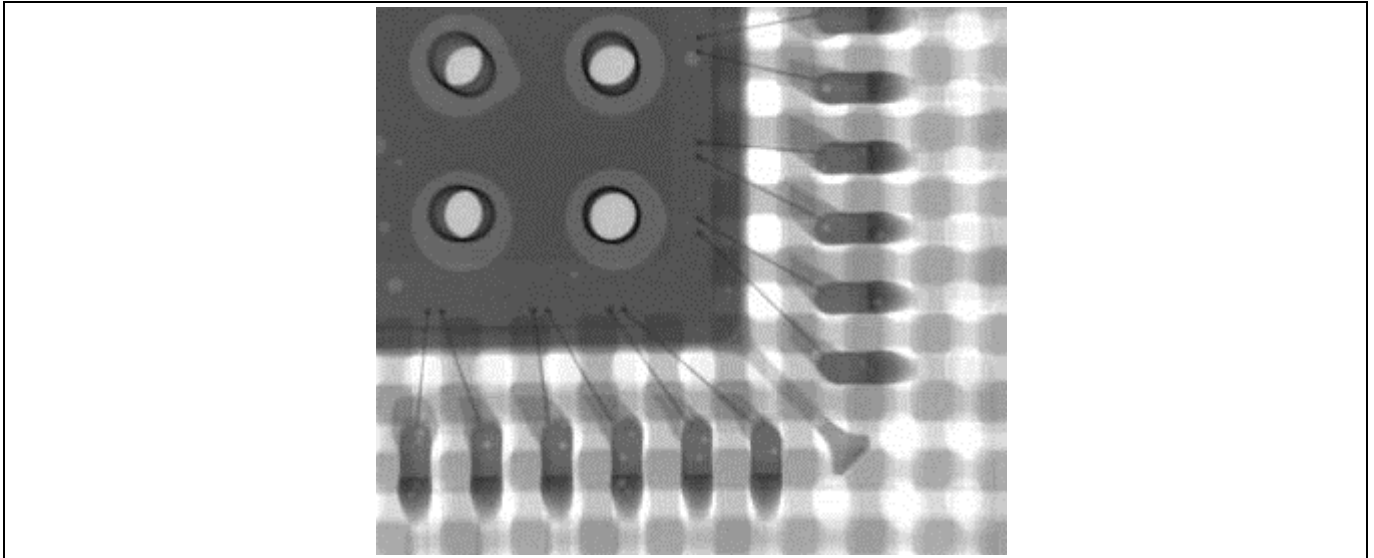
Typical X-ray image of a soldered VQFN package. Investigations have shown that voids similar in size and amount to those shown in this image do not reduce the package reliability.
